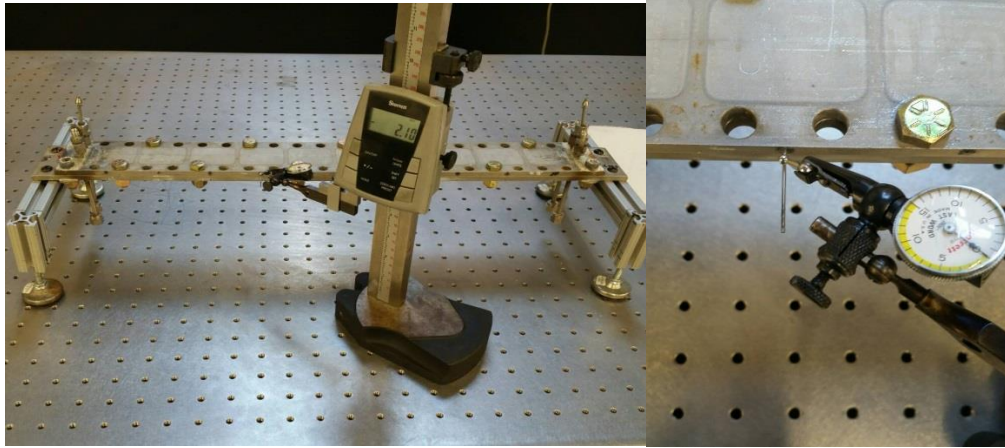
Coodinate measuring machine setup used to measure location of thermcouple holes.
